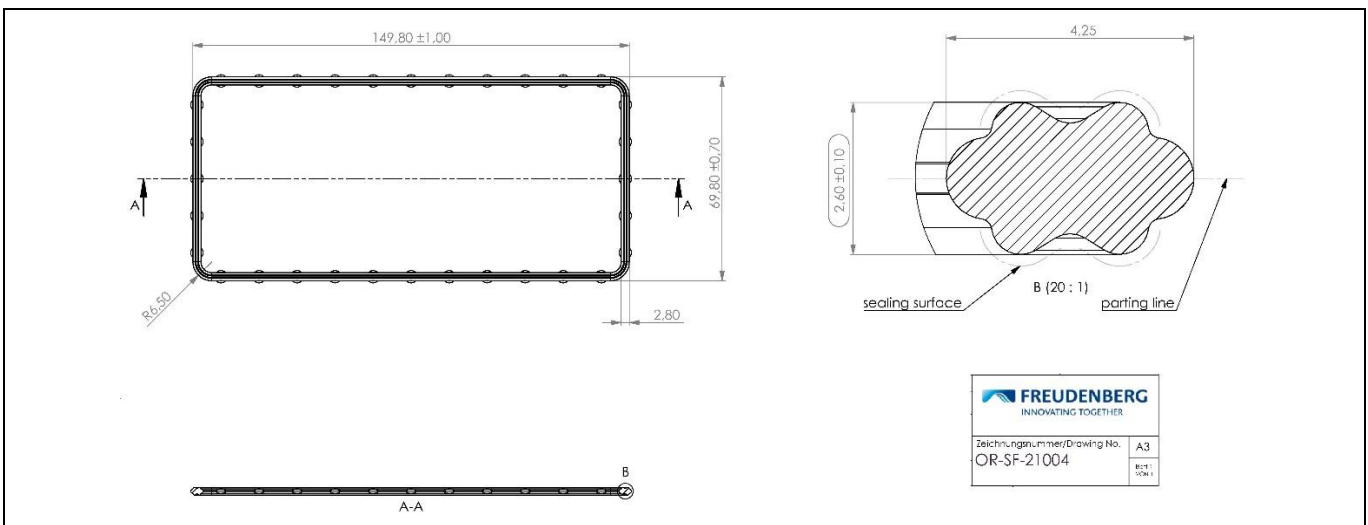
Drawing of sealing ring from Freudenberg Sealing Technologies OR-SF-21004.
